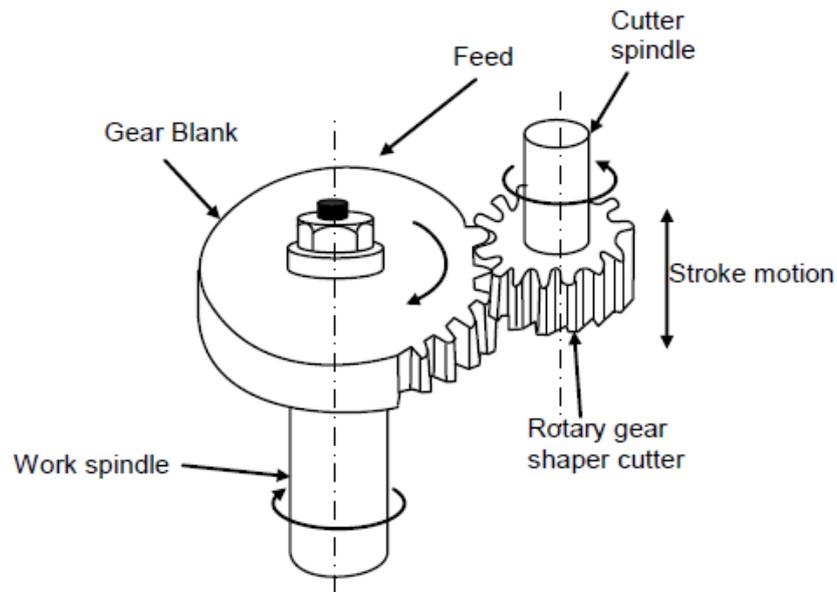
(a). Process of Gear Cutting by Shaper Cutter
